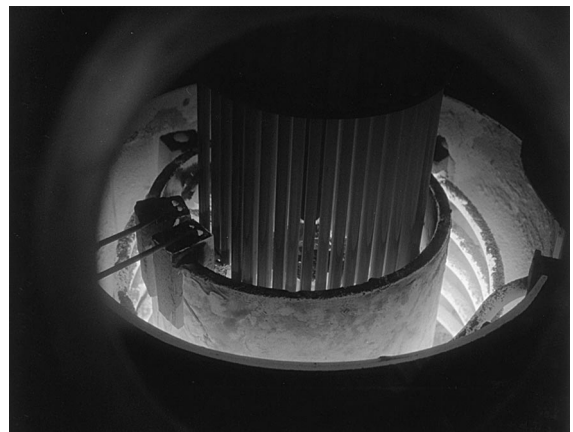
EBR-II fuel pins fabricated by injection casting.
